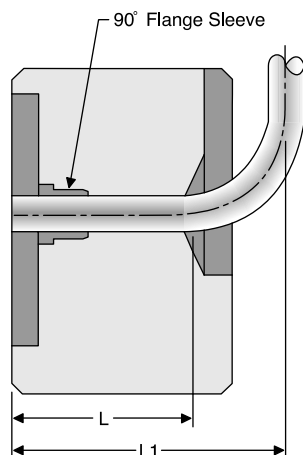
Minimum straight length to start of bend for 90° flanging
